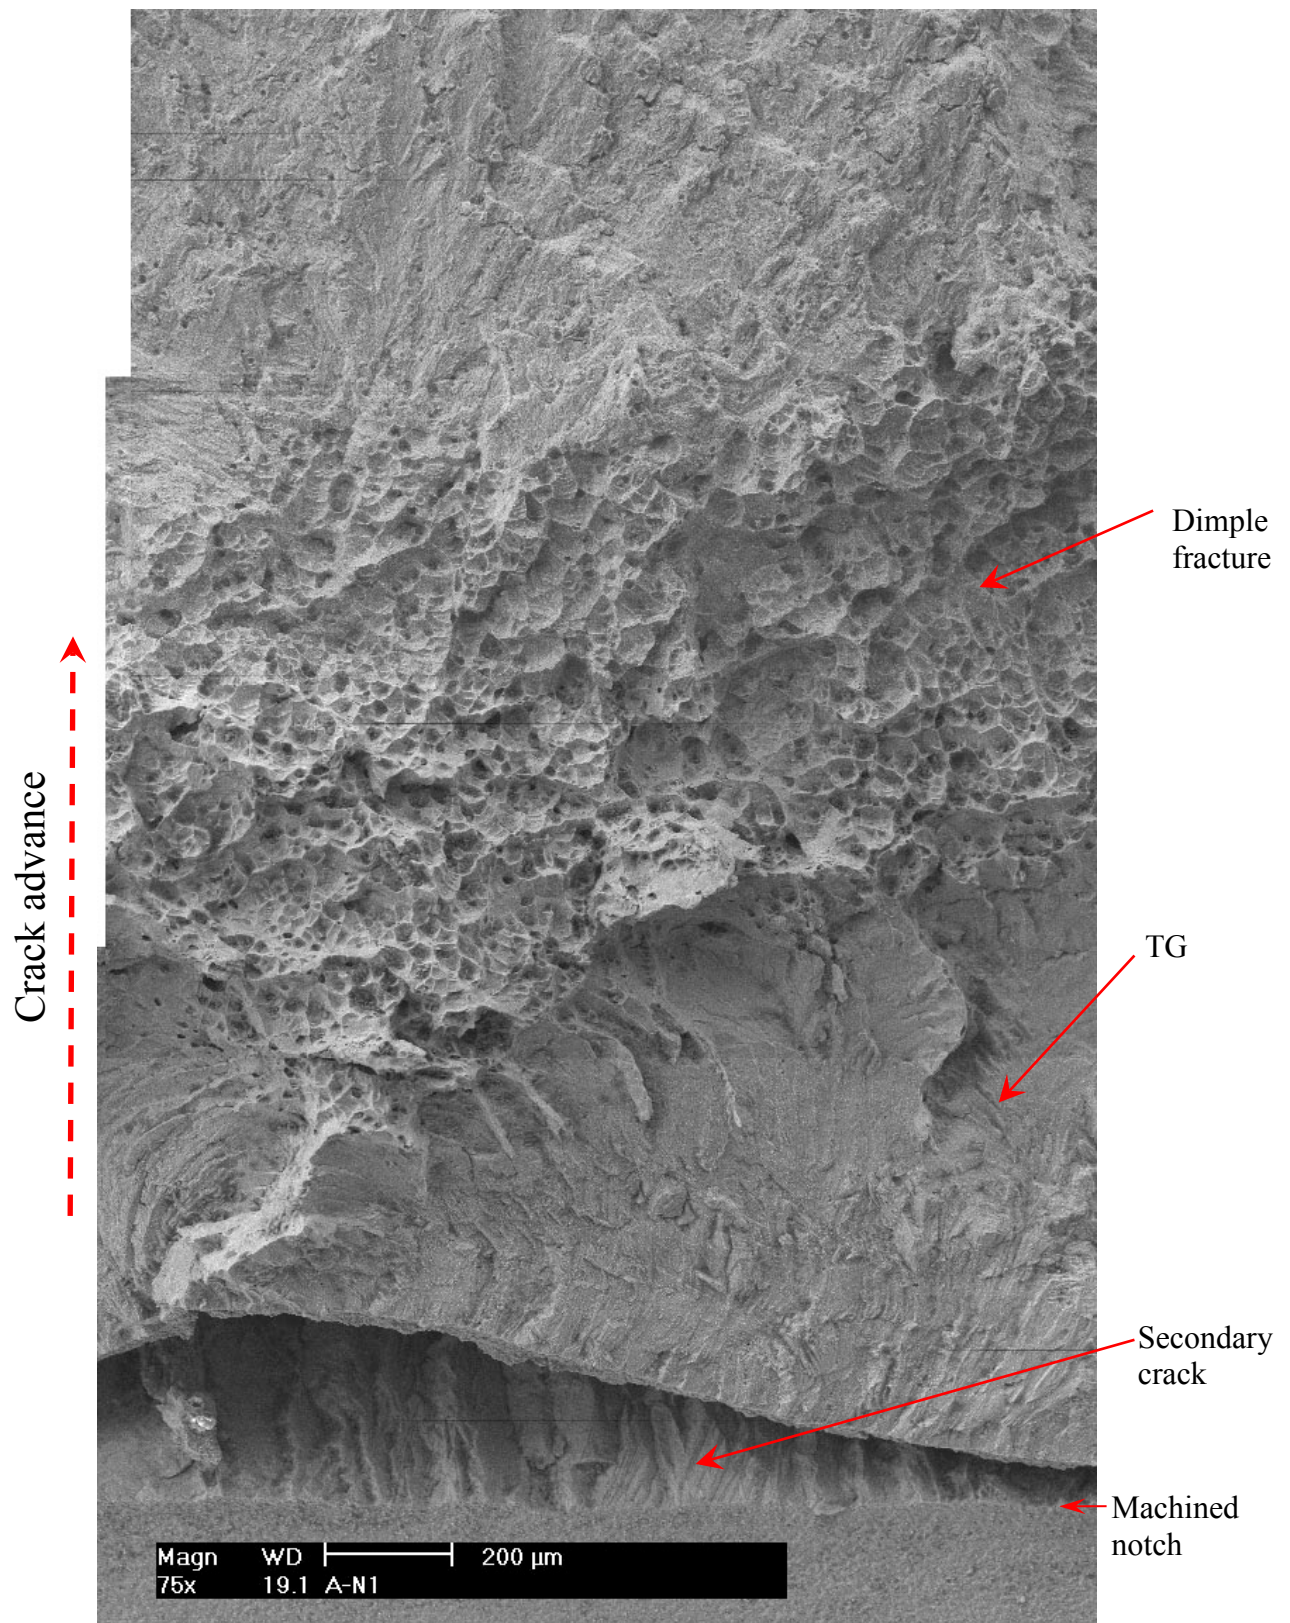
Fracture surface of specimen A-N1 along the sample central line.
